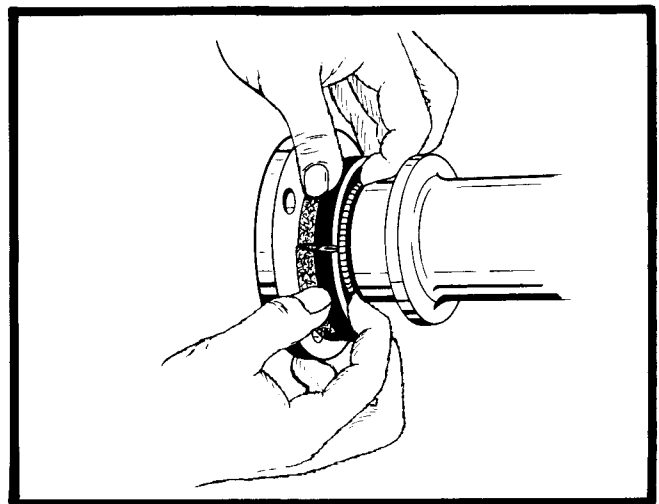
Installing Crankshaft Oil Seal Spring.
